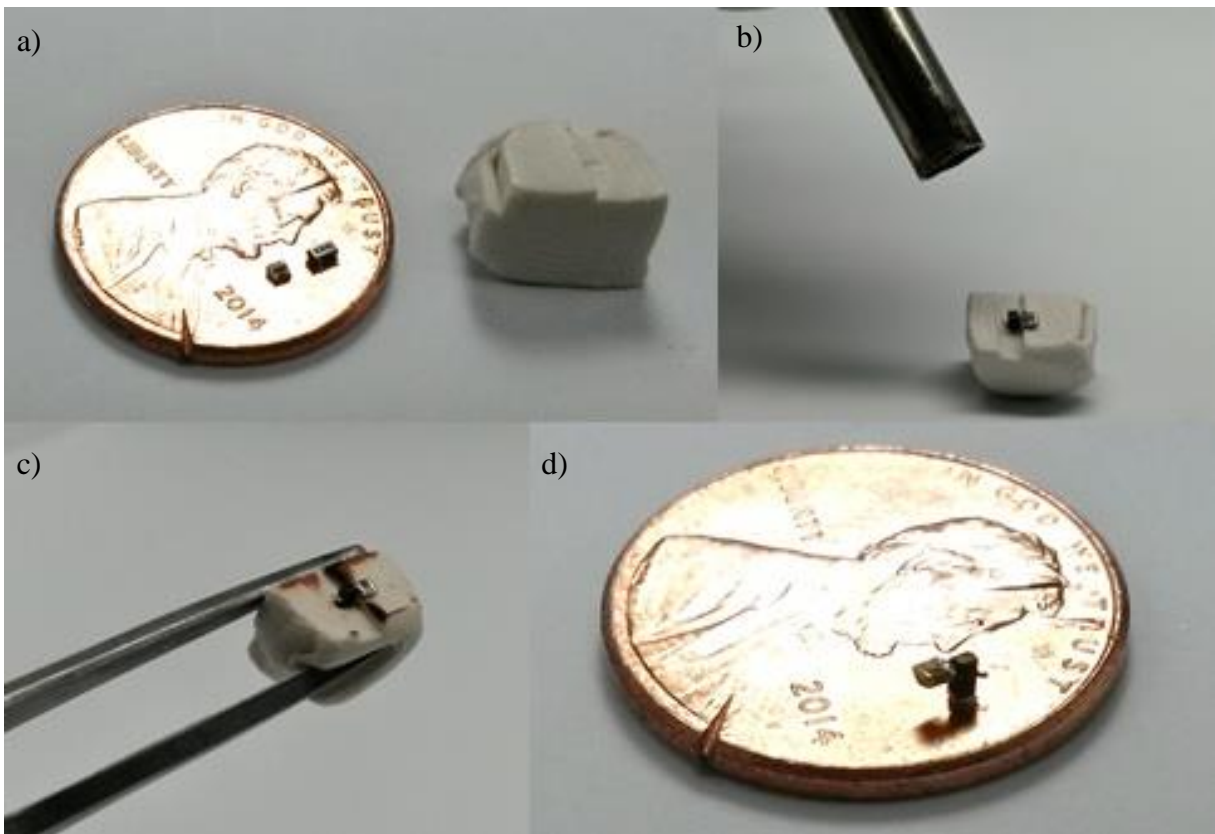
Custom fabrication process step utilizing clay substrate for SMD soldering, (a) components to solder and clay carved for support of 3D structure, (b) heating components laid out on clay with solder paste on interconnection, (c) components after soldering with clay showing minor shrinking, (d) a resulting structure.
